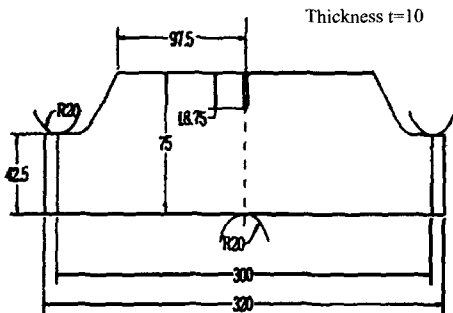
Dimensions of the new designed 3PB specimen. All dimensions are in mm
